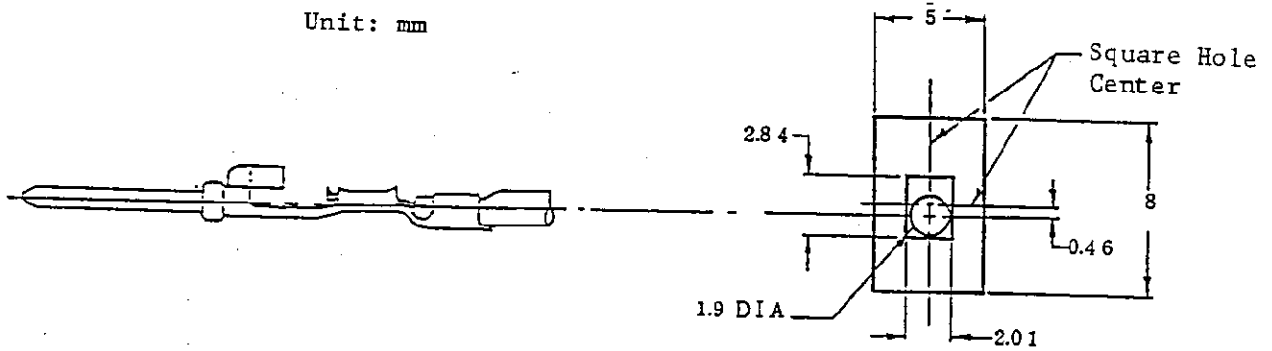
Gauge (For detail dimensions refer to Fig. 10.)
